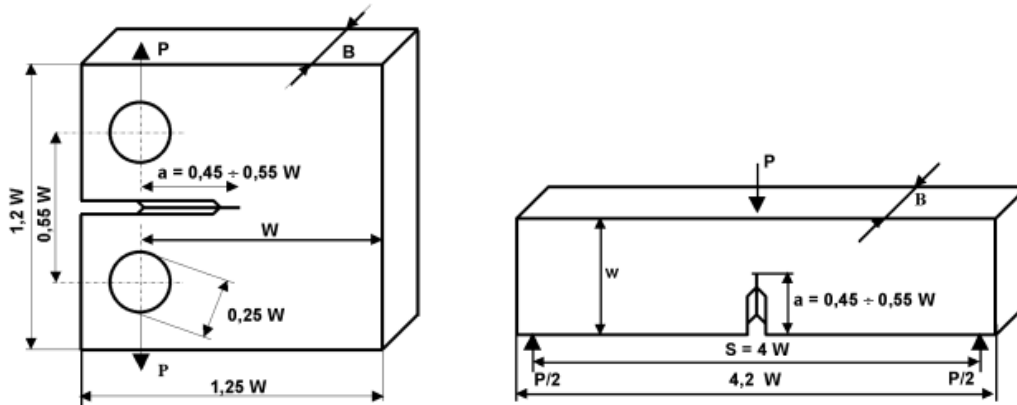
Standardized specimens for fracture toughness determination: CT specimen (left) and SENB specimen (right) [105]
